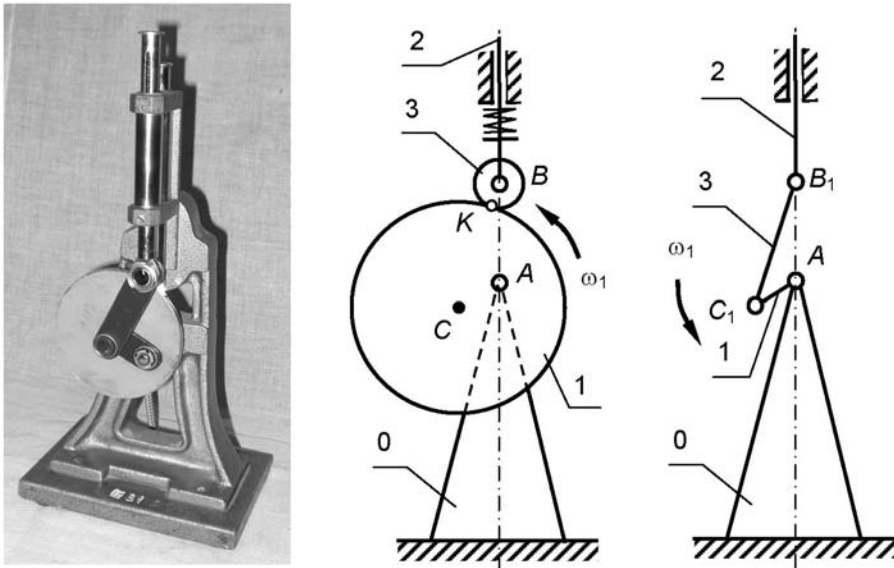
The model of a cam mechanism with a slider-follower and eccentric-cam
